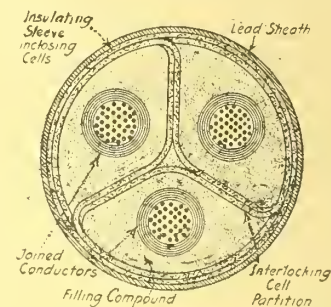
CROSS-SECTION OF COMPLETED JOINT.
